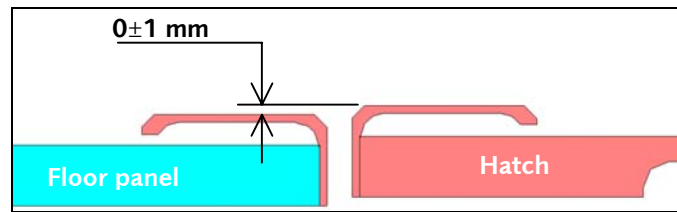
Vertical gap between hatch and floor panels (carpet not represented)
